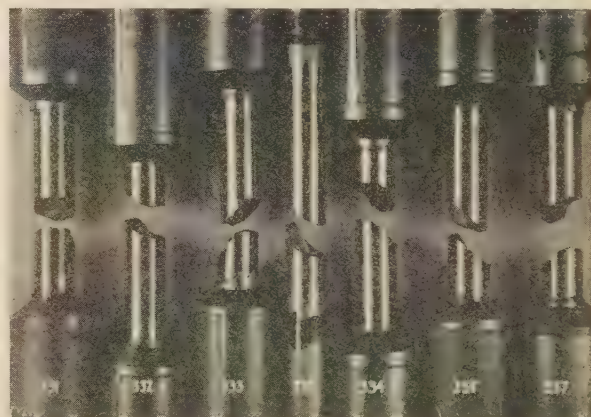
TYPICAL FATIGUE FRACTURES OF 0.221-IN. CENTERLESS-GROUND WIRE TESTED IN ALTERNATING TORSION
